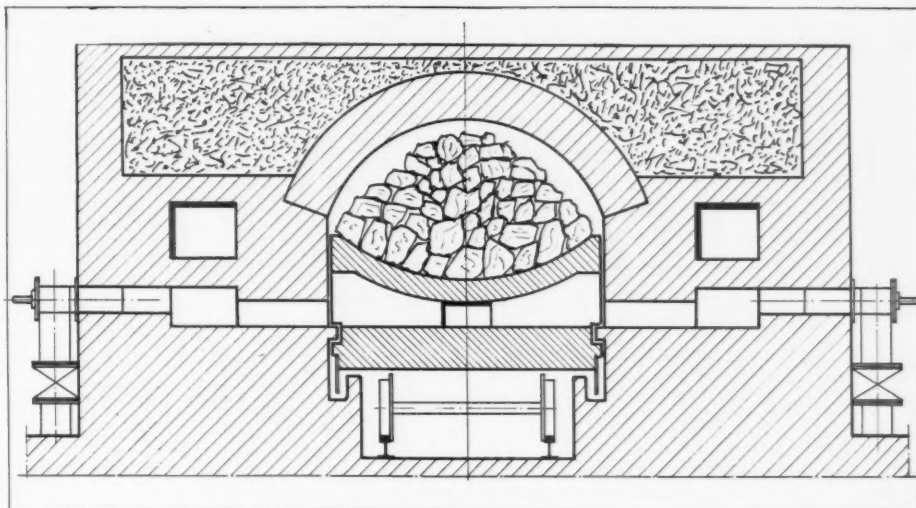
Cross section of a proposed tunnel kiln for burning lime, showing the position of the car. Note the type of car construction
